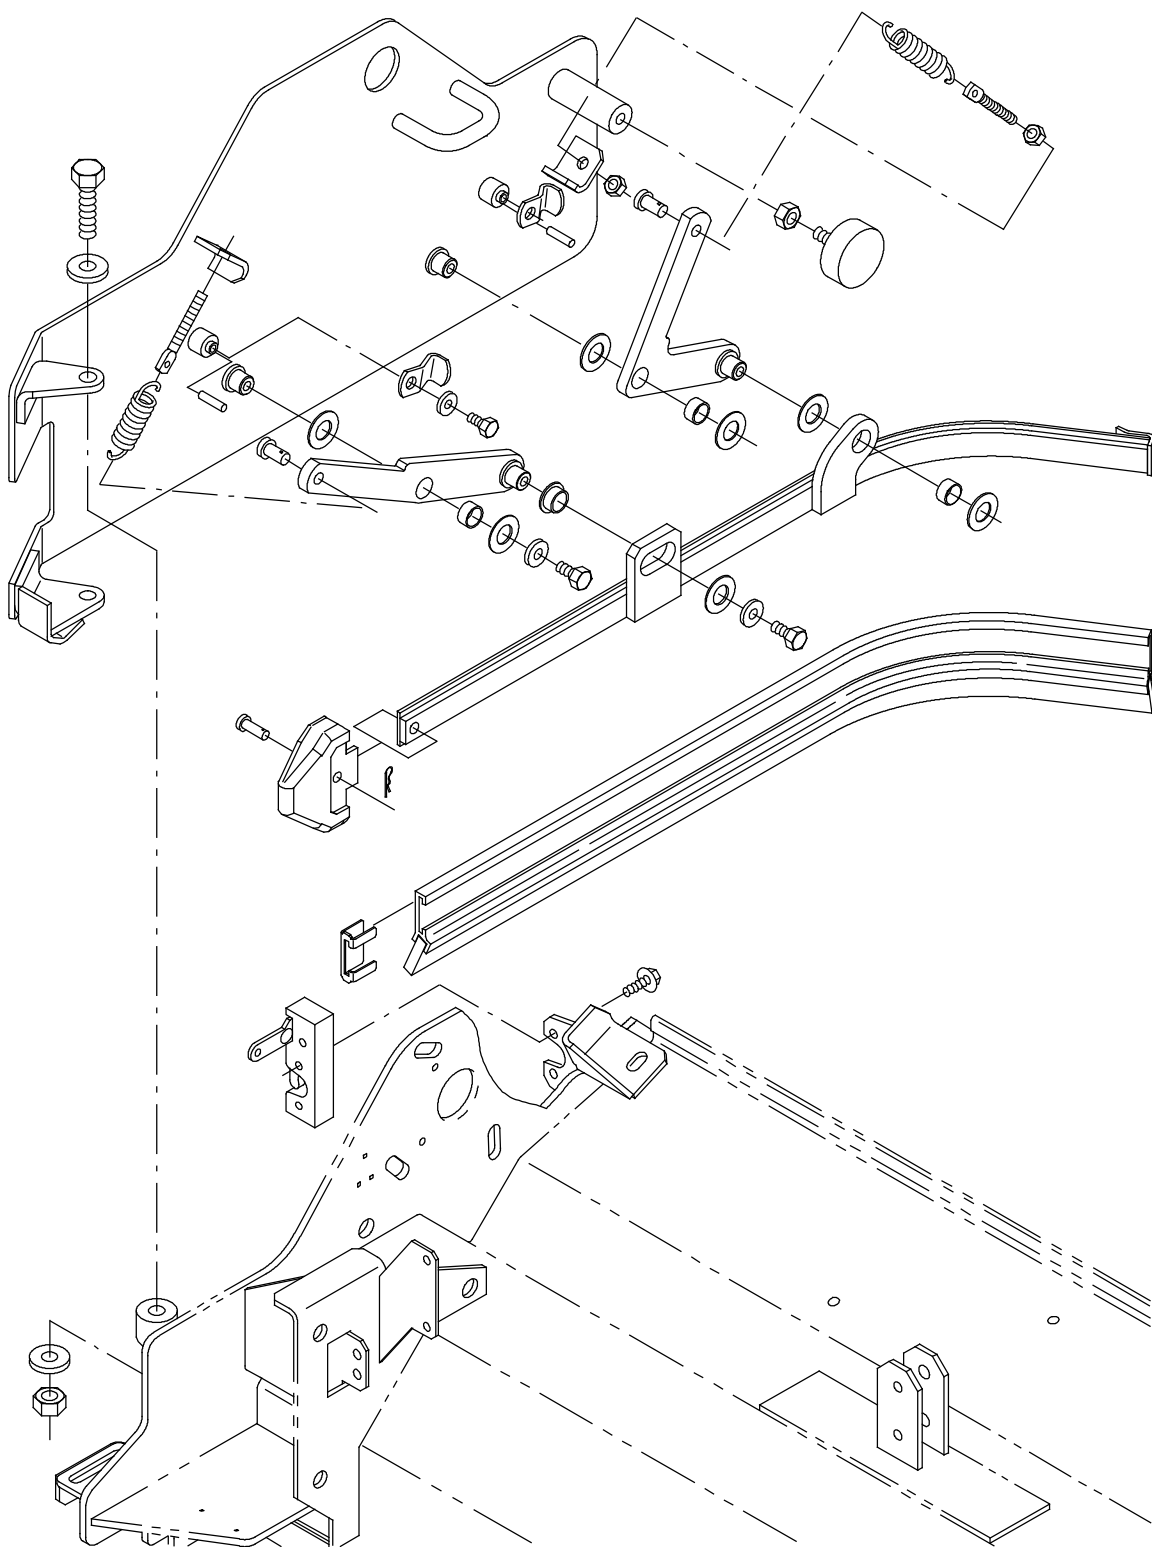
MaxPro 1000 Cylindrical Scrub Head Debris Tray Group
